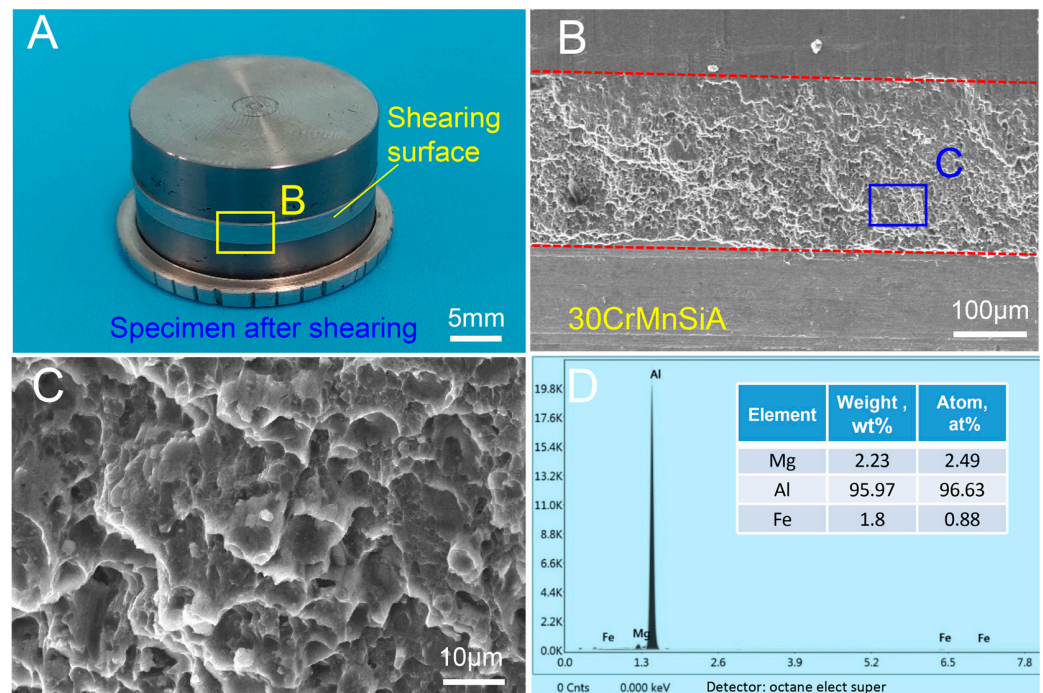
Micromorphology and chemical composition of the steel-side shear fracture: (A) Sheared specimen; (B) Larger view of (A); (C) Larger view of (B); (D) EDS of (C).
